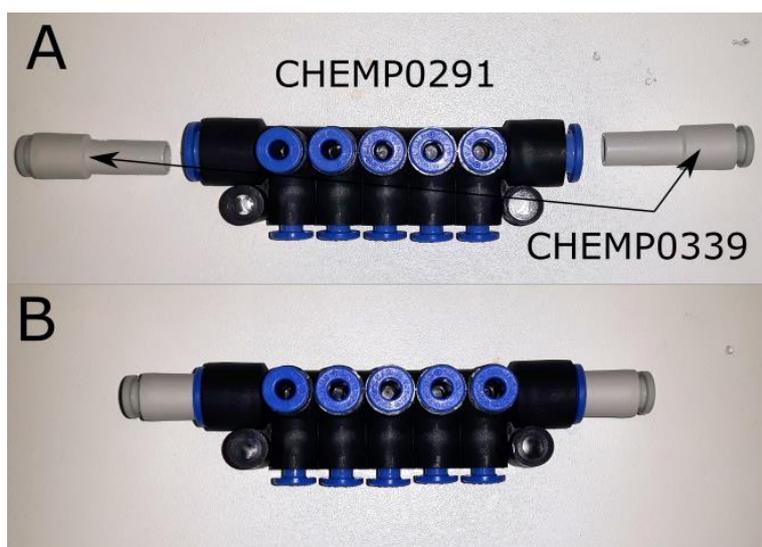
Assembly of distribution manifold: A) the source parts and B) the finished assembly.
